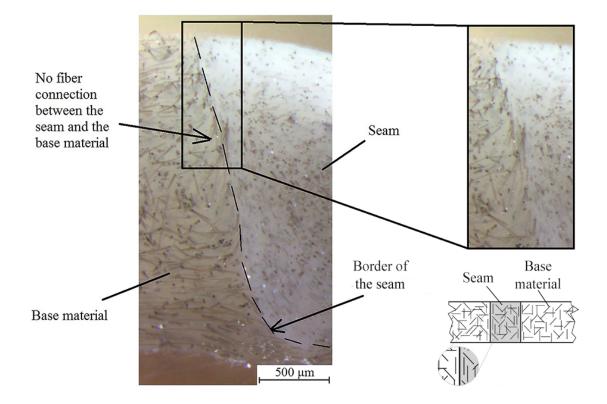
Friction stir welded thin sheet made of PLA+30BF
